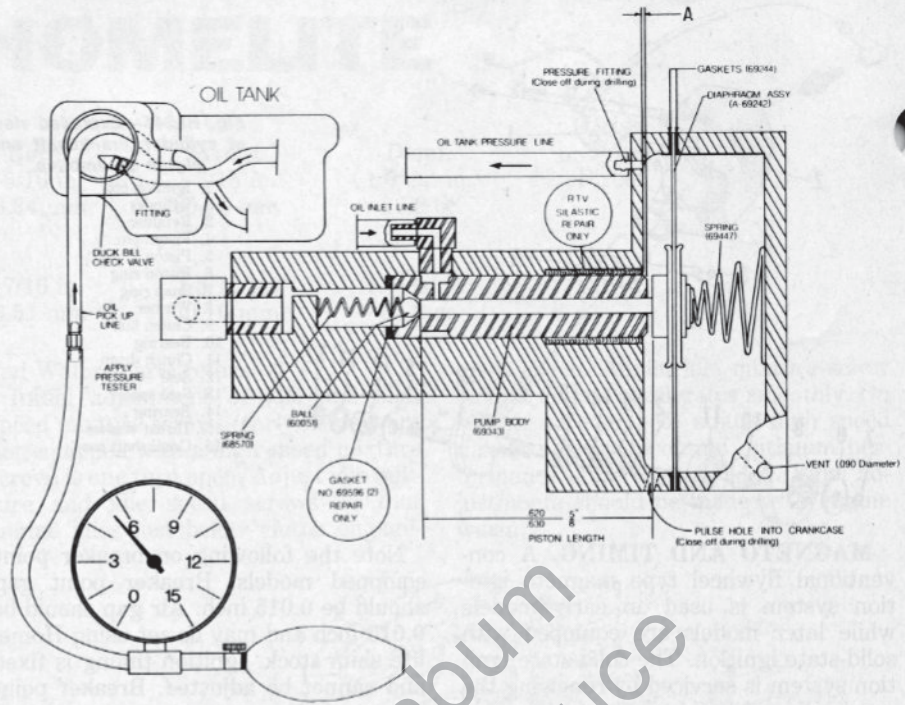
Diagram showing pressure tester hook-up and diaphragm oil pump components.
